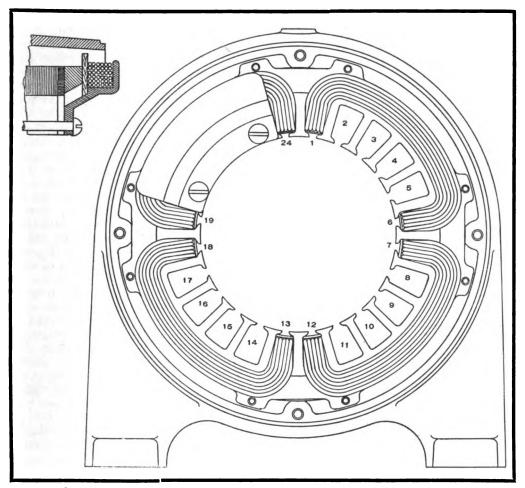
STATOR WINDING FOR SINGLE-PHASE MOTOR, SHOWING STARTING COILS IN POSITION, BUT NOT TAPED
